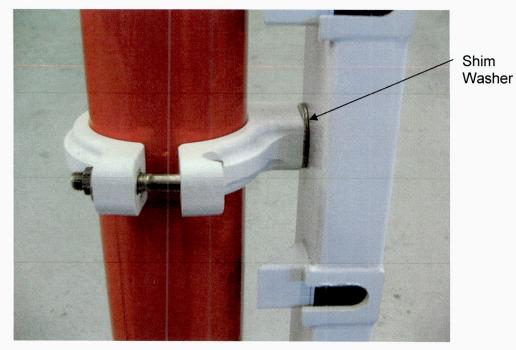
Beam Adjustment, Step 1 – Shim Rear Beam
